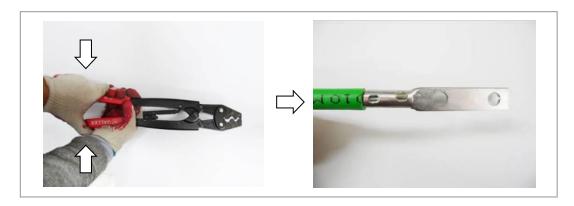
Fixing Pressure Terminal_Handheld Compressor (5)
